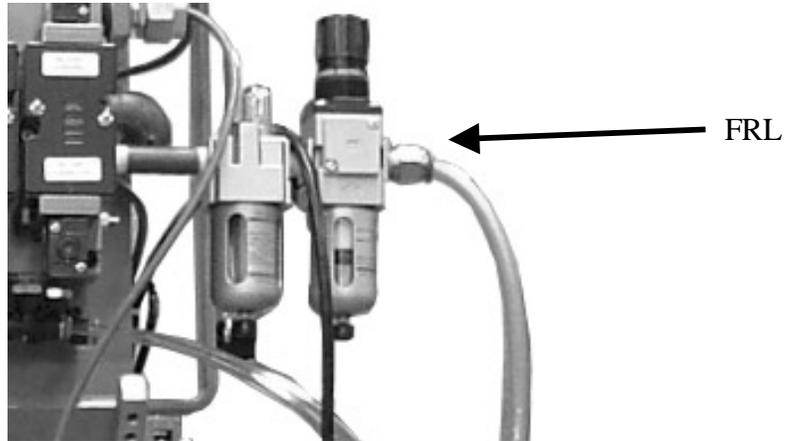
Filter/Regulator/Lubricator (FRL) Assembly
